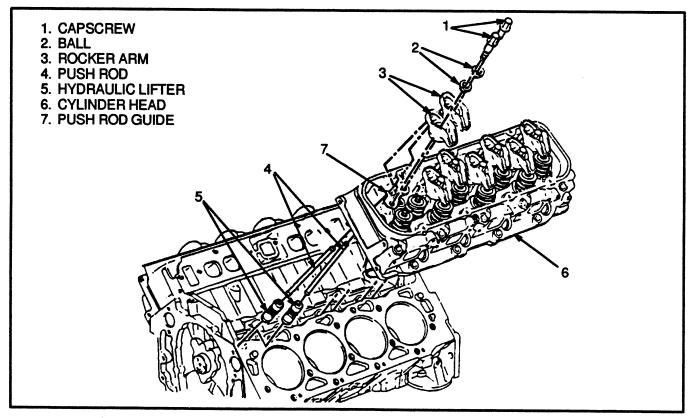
REMOVE THE VALVE TRAIN COMPONENTS AND CYLINDER HEAD
